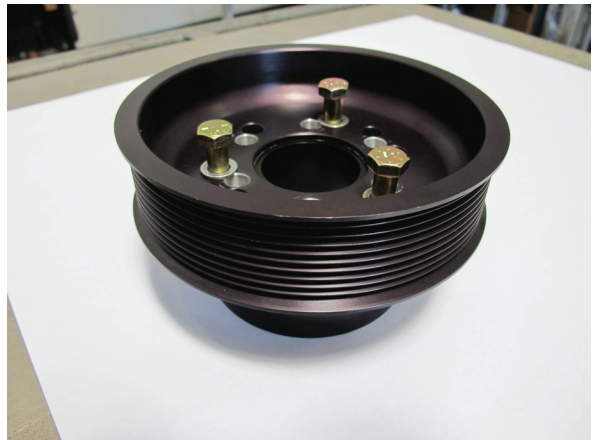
a: Pre-Assemble Crank Pulley Assembly
